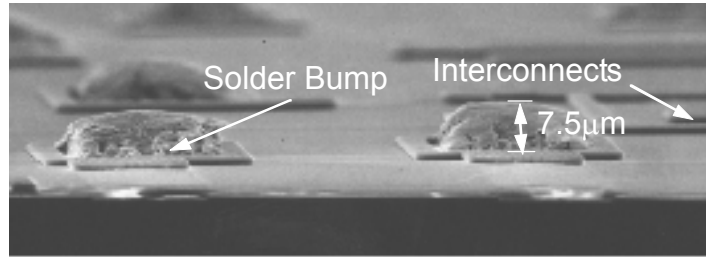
SEM showing the solder bumps deposited on the BiCMOS wafer.
